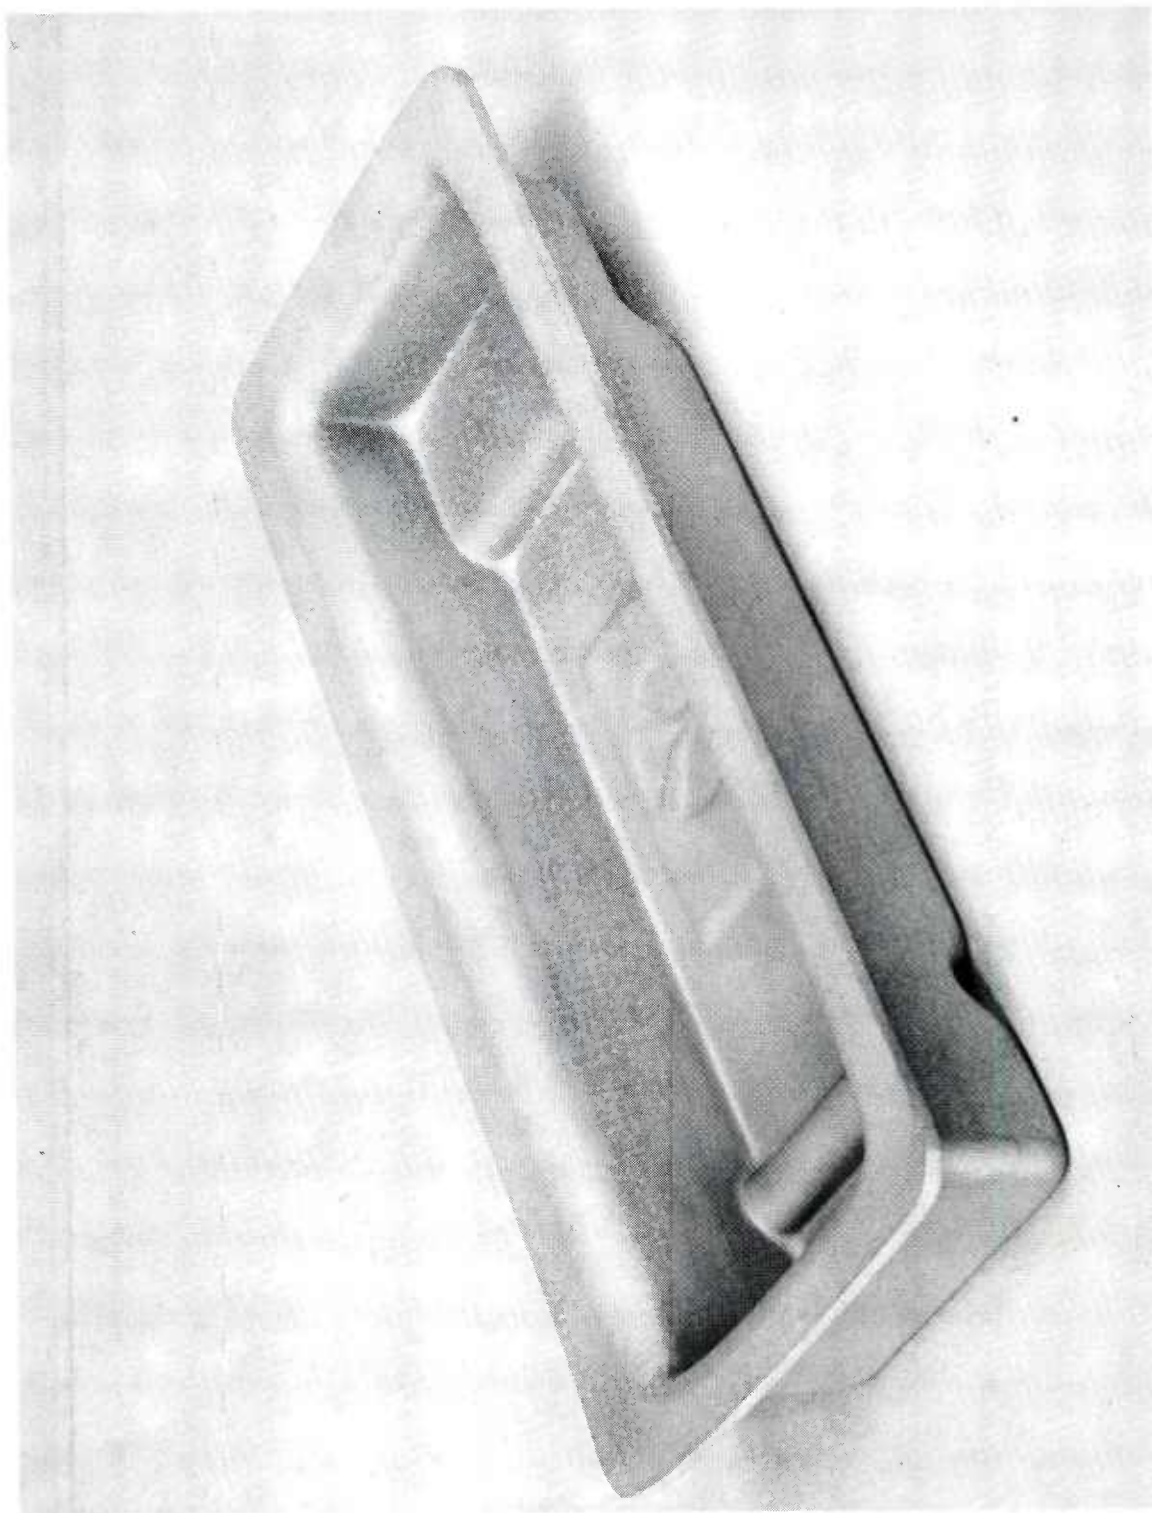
Superplastically formed part no. 7 showing the inside of the part.
